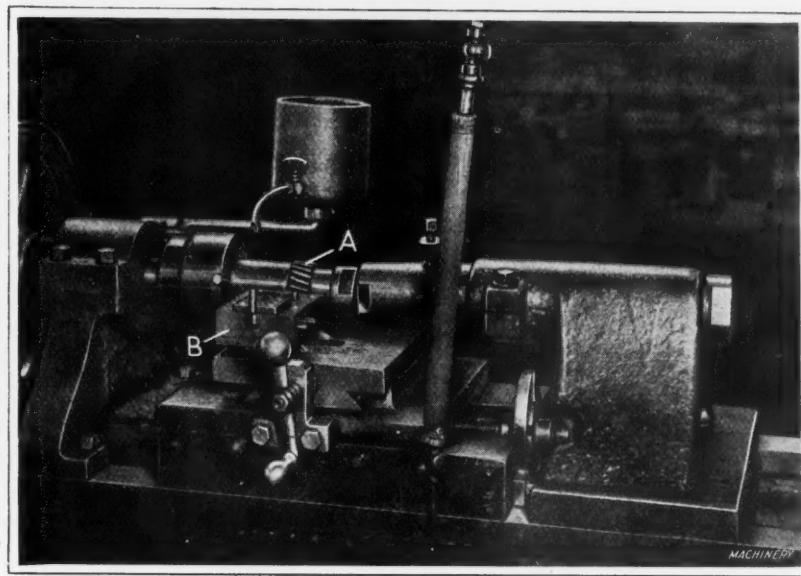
Equipment used in milling the End Surfaces of the Chasers in which the Threads are subsequently cut
